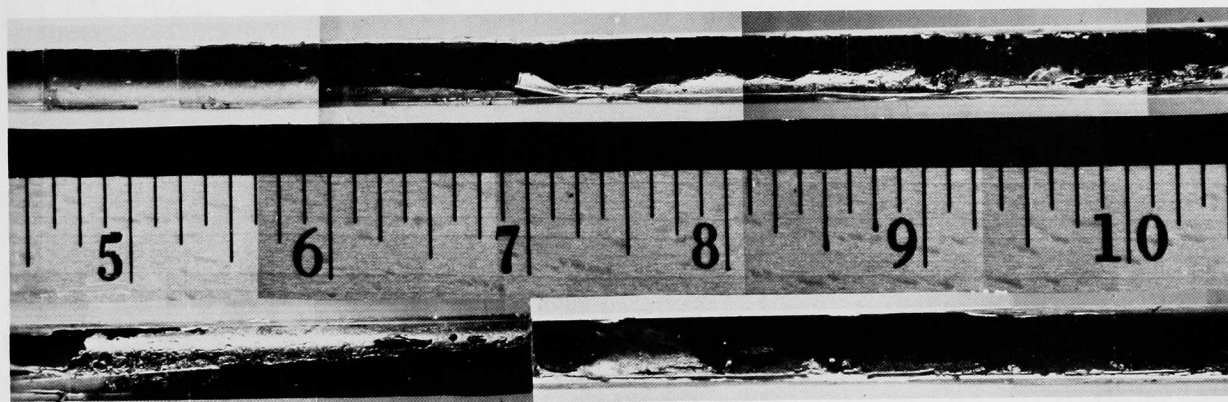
Inside Surfaces of Inner Wall, 5-10 in. from Bottom End Plug. Neg. No. MSD-168135.
